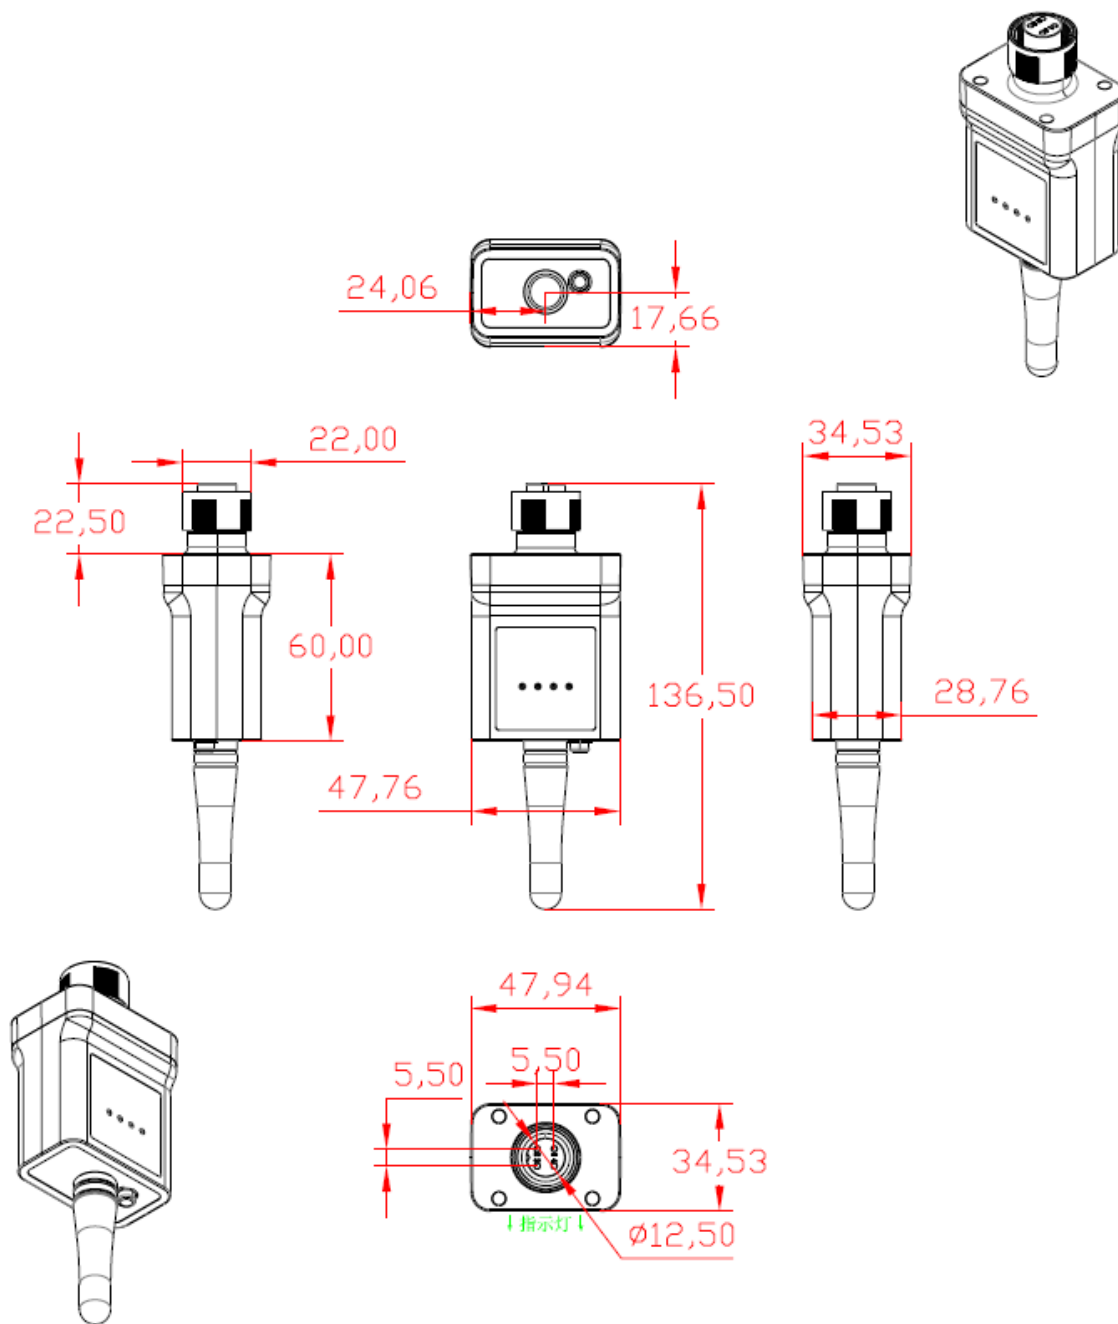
Solar Plug-SWB1-27 Mechanical Dimensions
